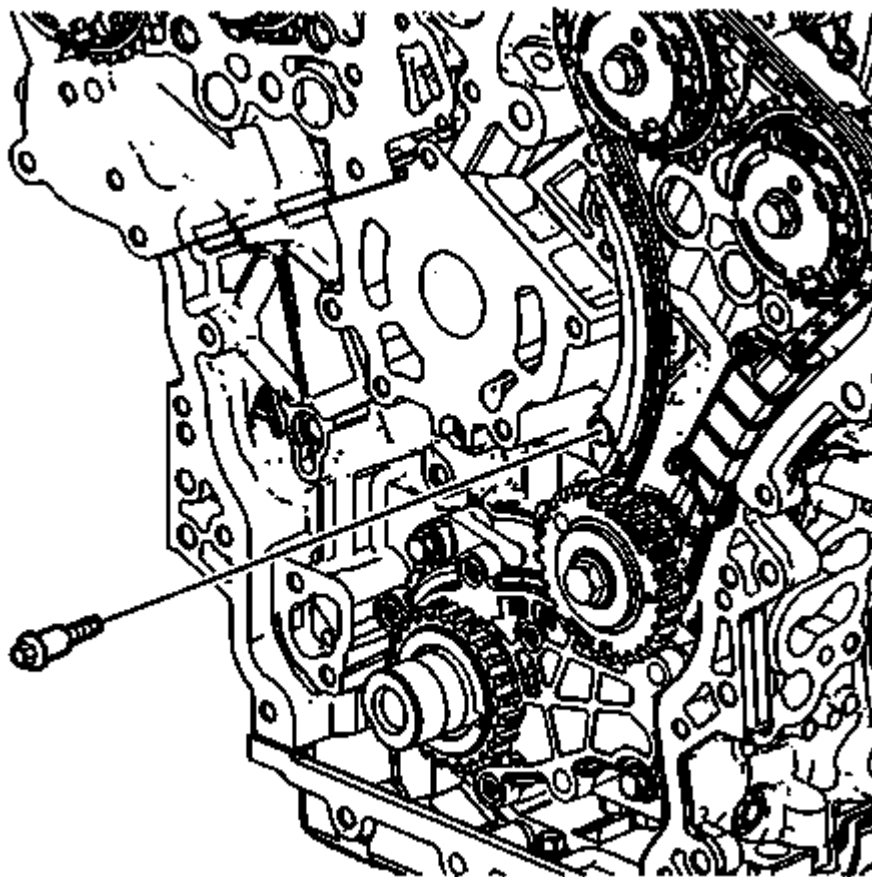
Identifying Secondary Camshaft Drive Chain Shoe Bolt
